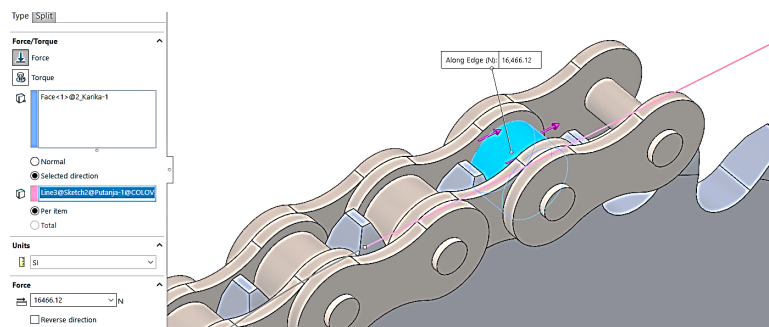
Sprocket with chain links (a zoom of the part of the assembly).
